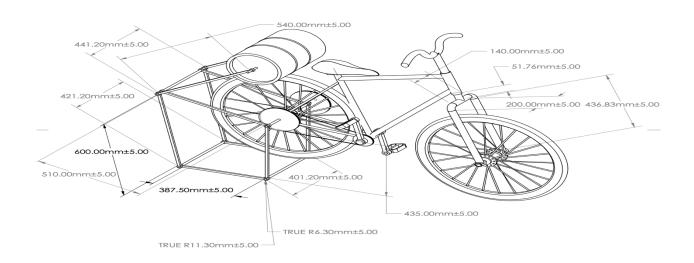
Dimensioned 3D SolidWorks Model of Prototype
